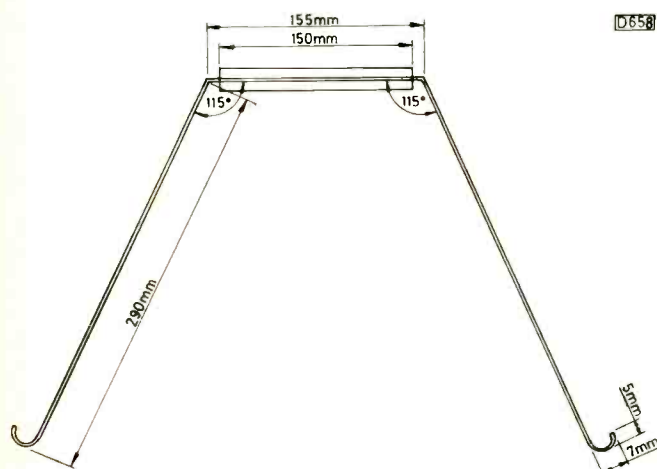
Constructional details. Dimensions are a guide only. Larger tubes will require different angles.
